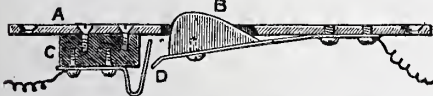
Bellars' Improved Burglar Contact in Section—A, Brass Plate; B, Brass Tongue; C, Ebonite or Hardwood Block; D, Rubbing Spring.
